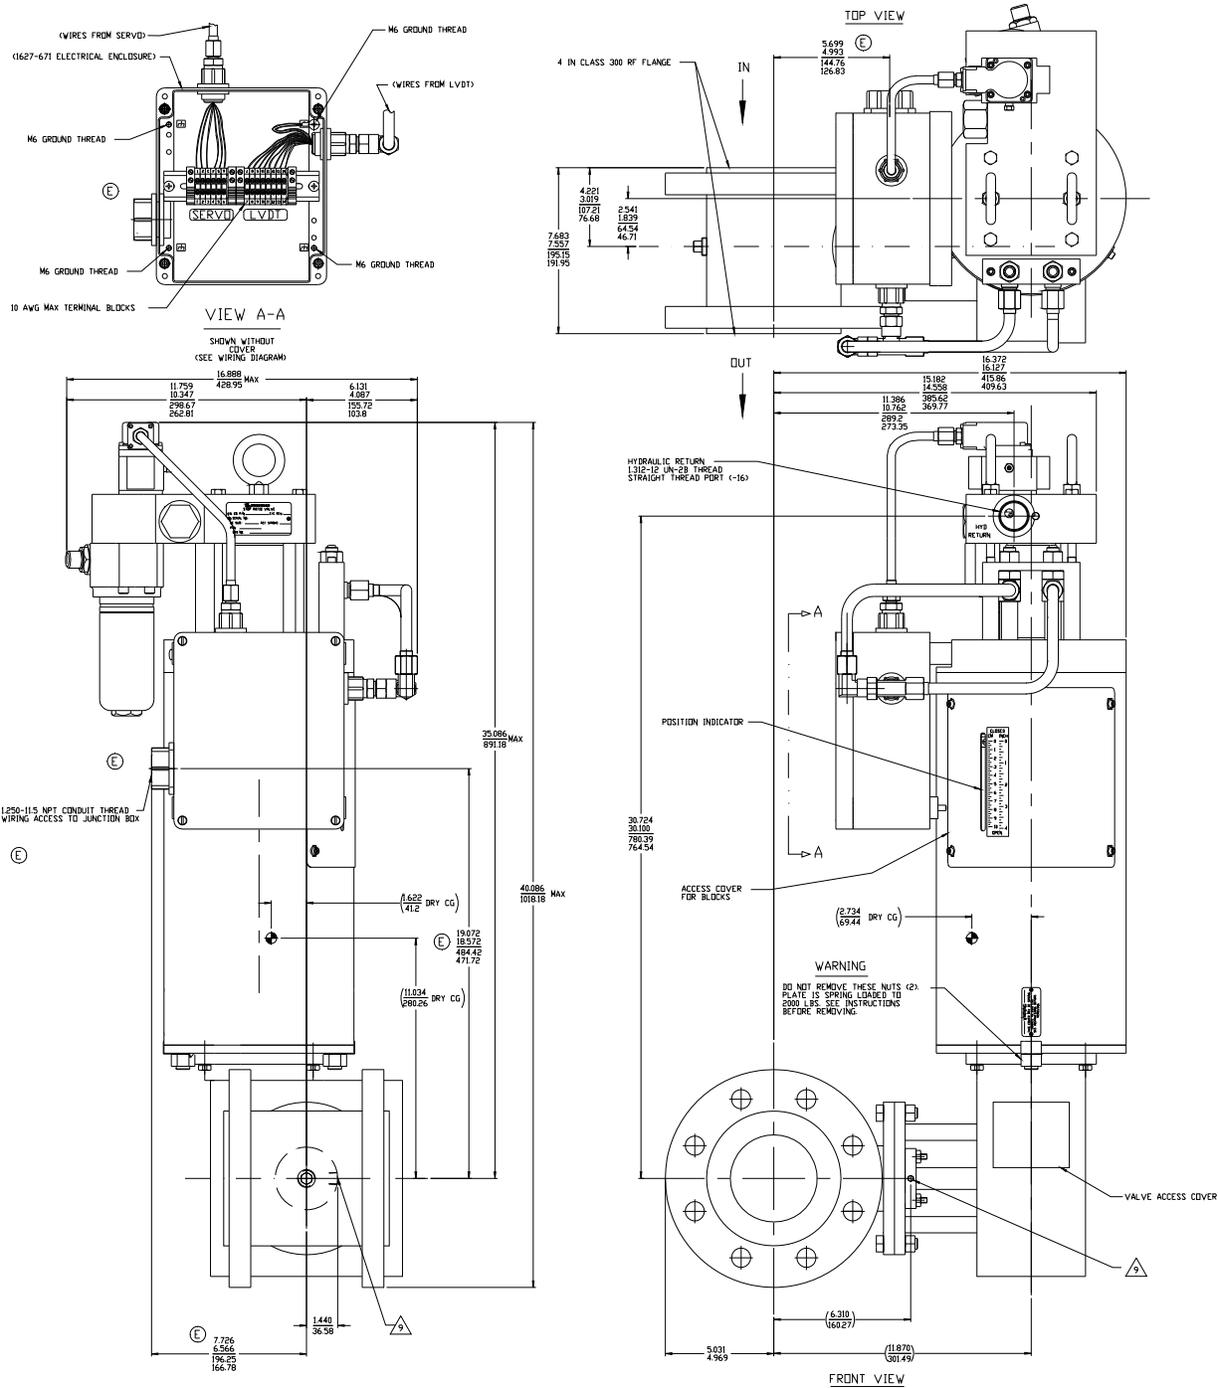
Gas Stop/Ratio Valve Outline Drawing (4-inch)
